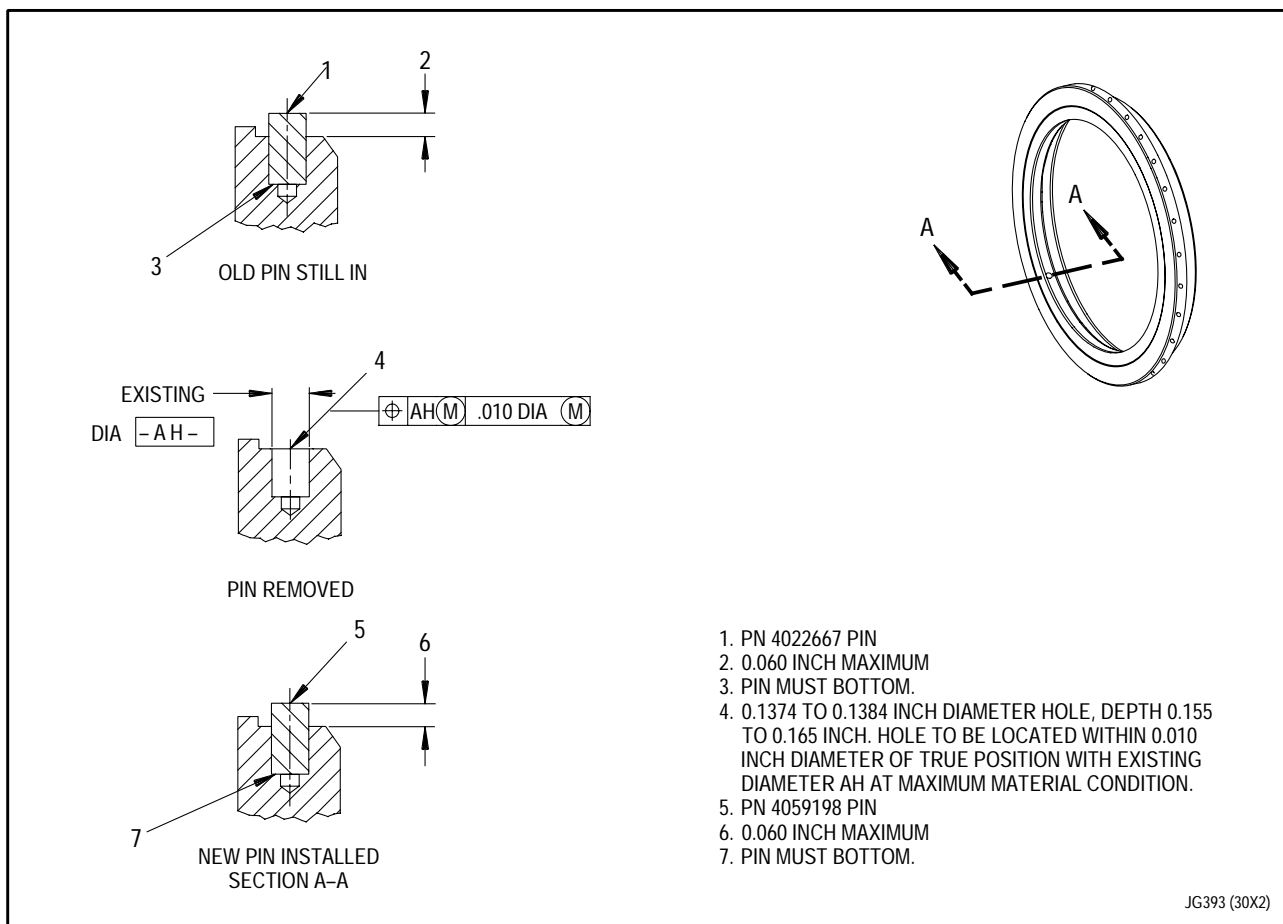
No. 3 Bearing Front Seal Seat Assembly - Dowel Pin Hole Repair
